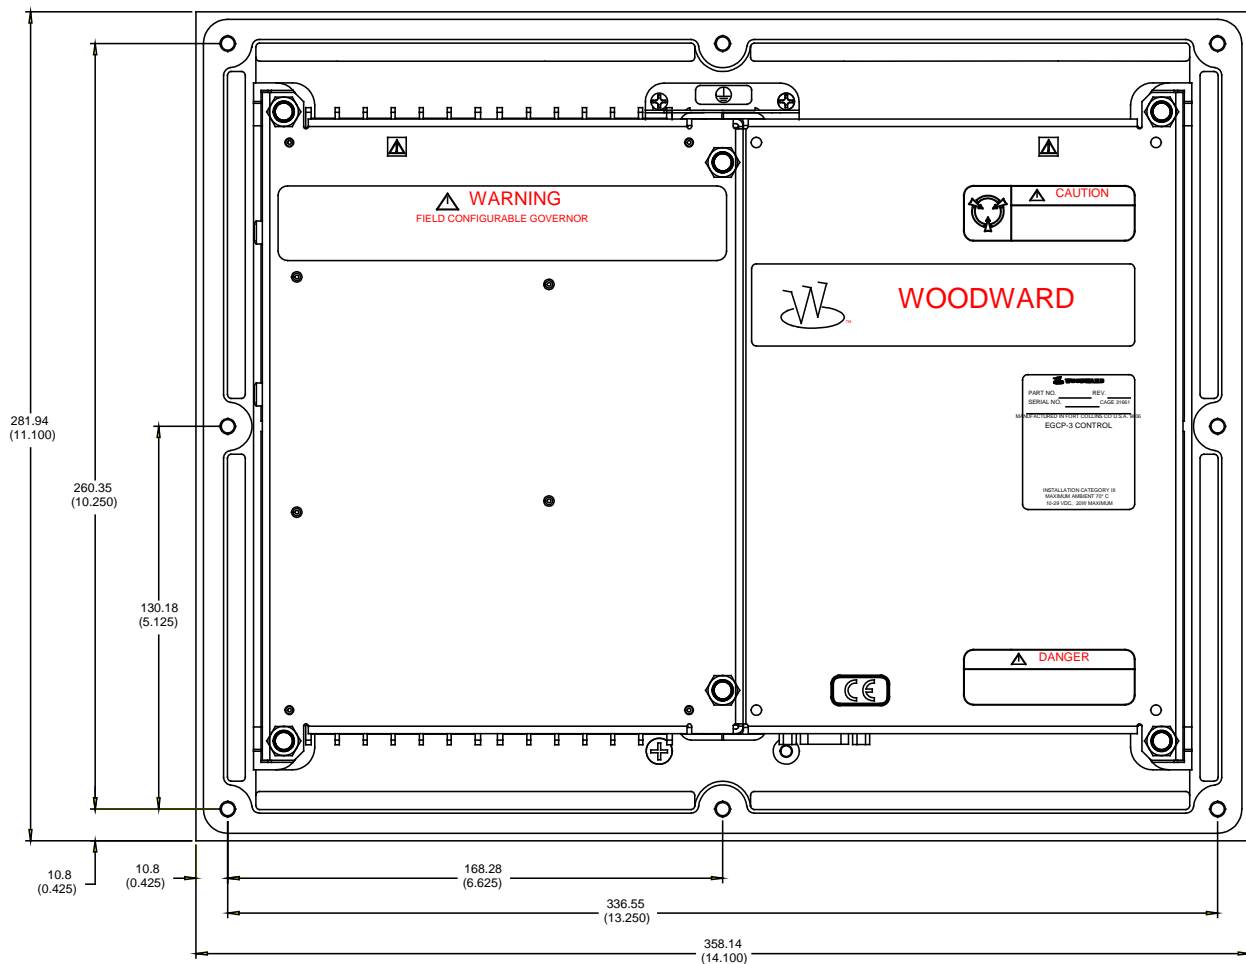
EGCP-3 Outline Drawing (back view)
